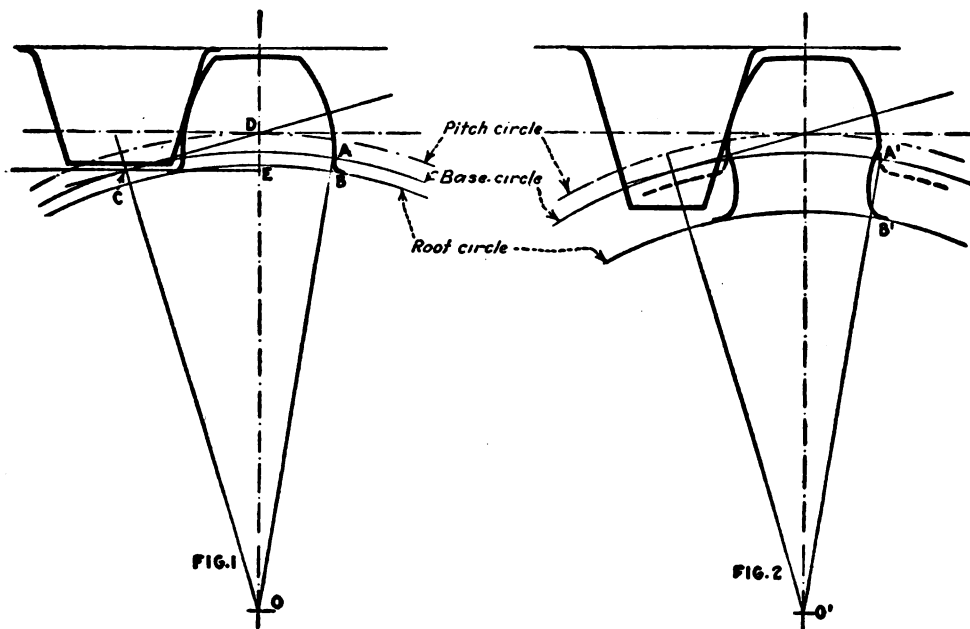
INVOLUTE TOOTH IN MESH WITH RACK, SHOWING FILLET. FIG. 2—INVOLUTE TOOTH SHOWING UNDERCUT
